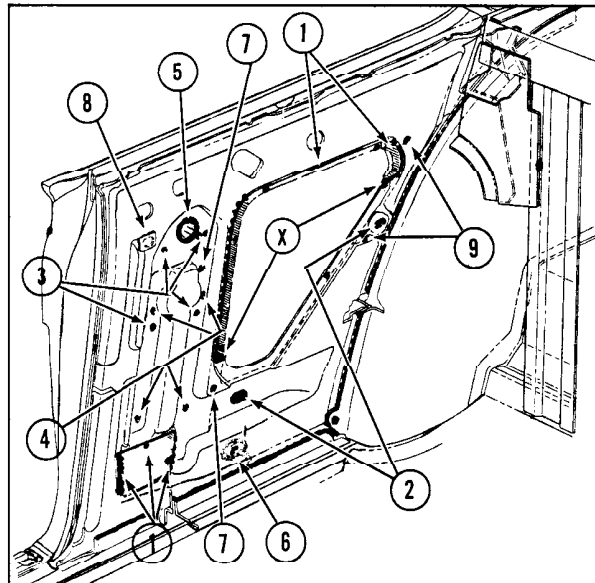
Inner Quarter Panel Sealing ("37" Styles)
